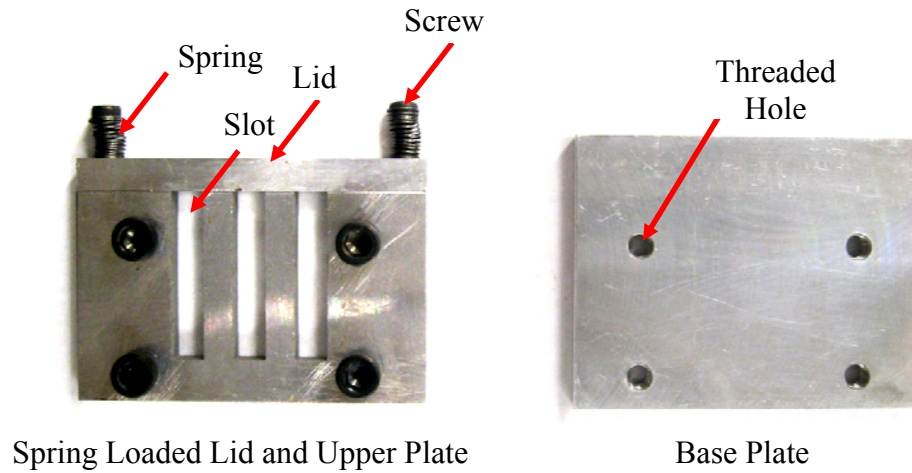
Mold Assembly for Iosipescu Shear Specimens
